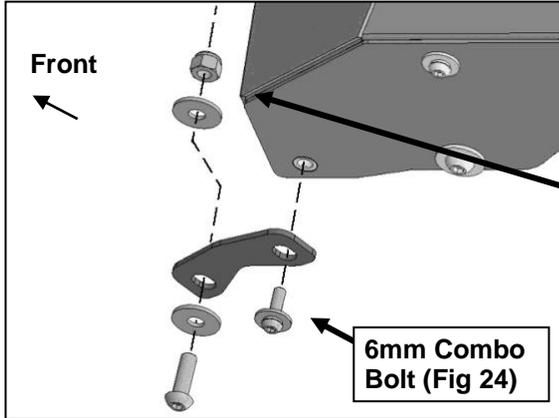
Attach Skid Plate and Support Brackets to bottom of Bumper
